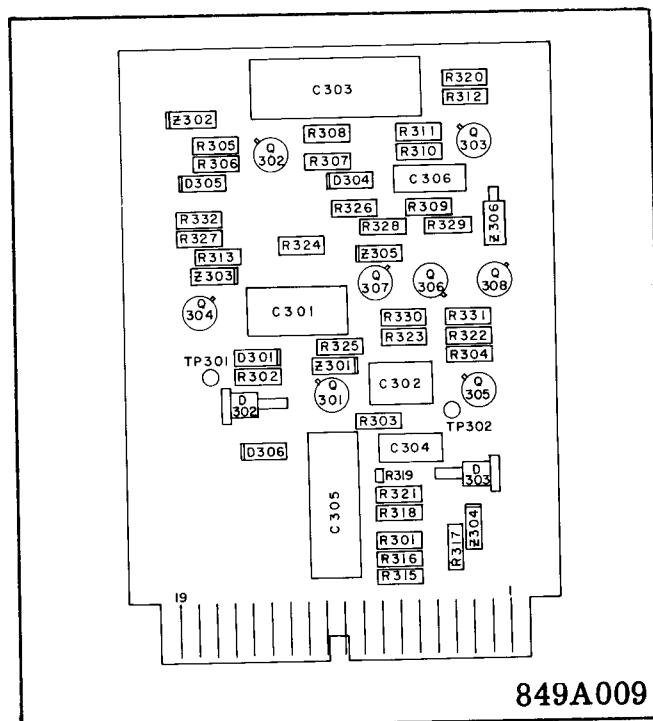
Component Location on Output Printed Circuit Board for Type SKBU Relay
